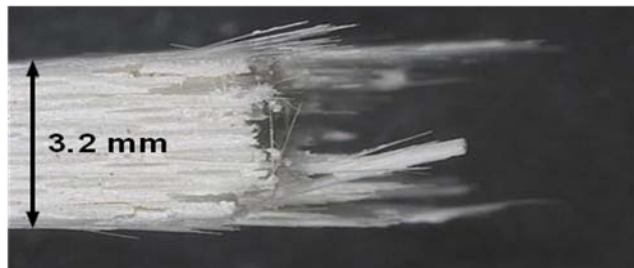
Fracture surface of the N720/AM specimen(2) tested in tension to failure with constant loading rate of 25MPa at 1100°C in steam (side view).
